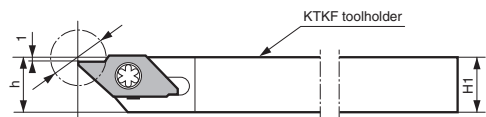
When a TKF-AS / -ASR insert is attached (The cutting edge is 1mm lower than the center line)
